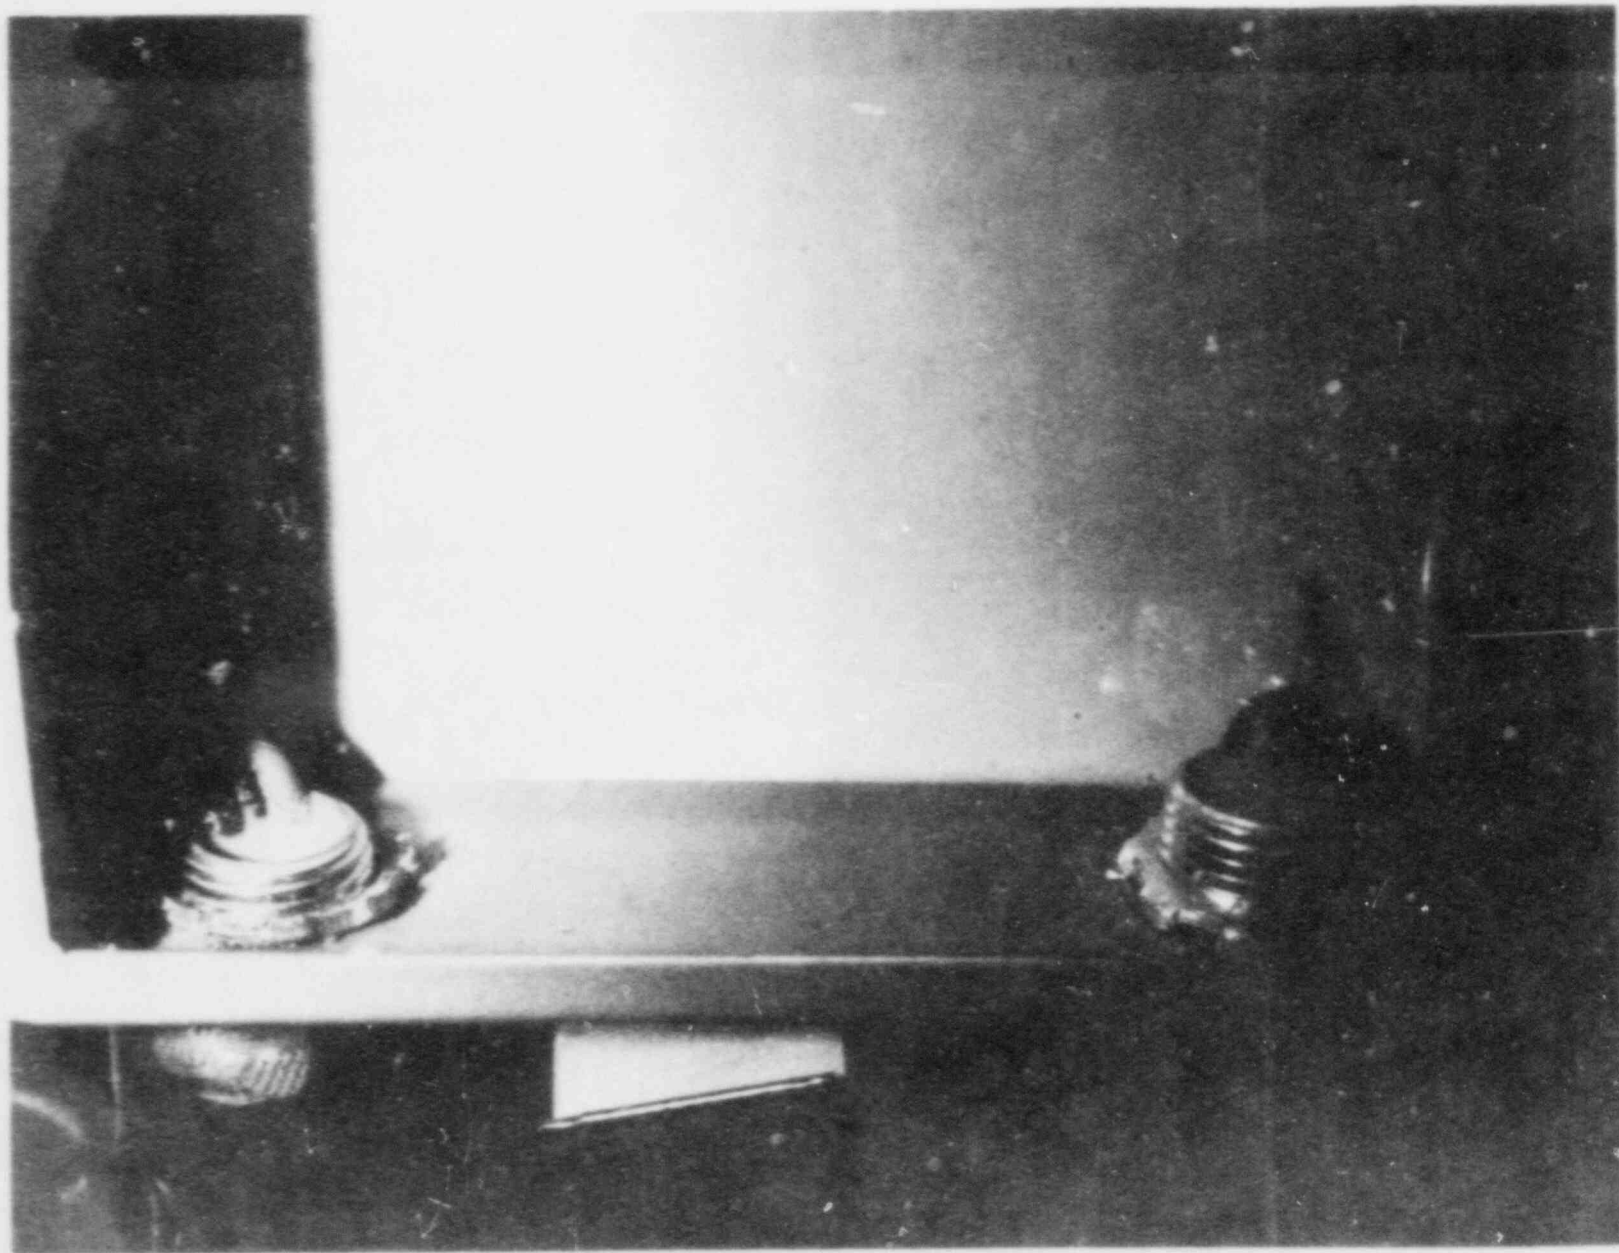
Assembly Photograph V - Encapsulated Wire Inlet
